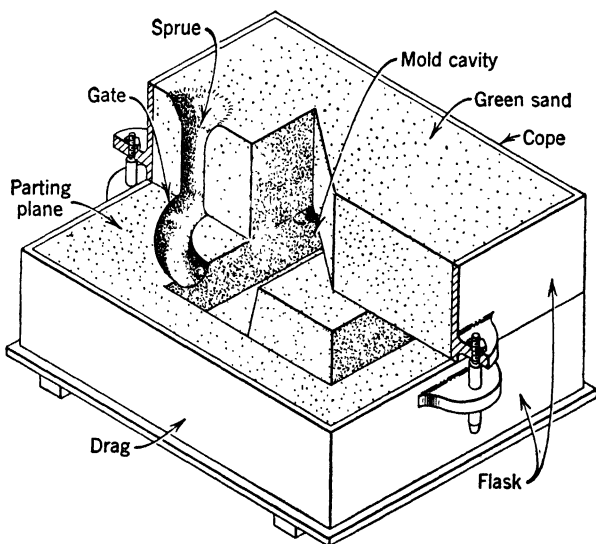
Green sand mold with cope sectioned to show interior of mold.
